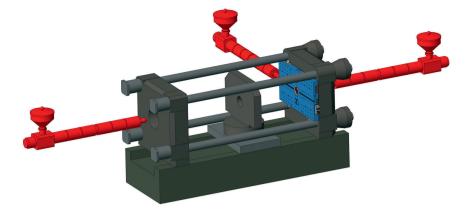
Installation version of the hot runner intermediate plate on the fixed plate of the KM 2300 MXW Twin SP24500/810 injection molding machine with bolt-on unit SP3000. © A&E Produktionstechnik
